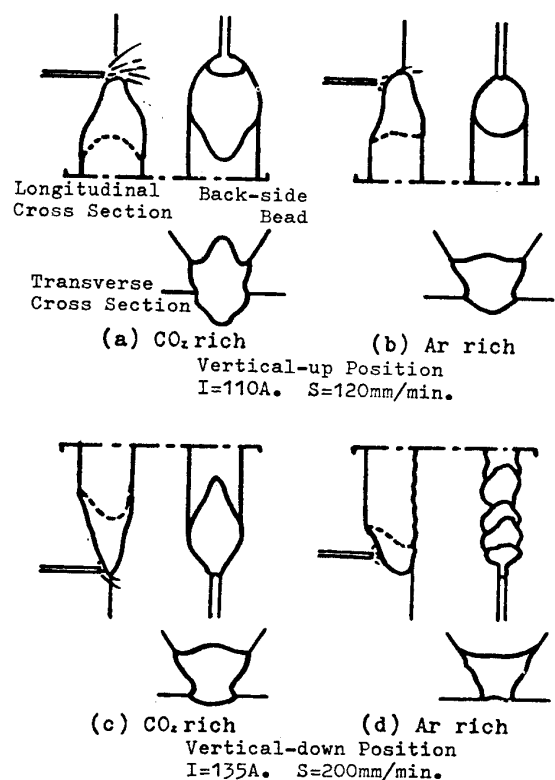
Typical molten pools under various shielding gases and welding positions
